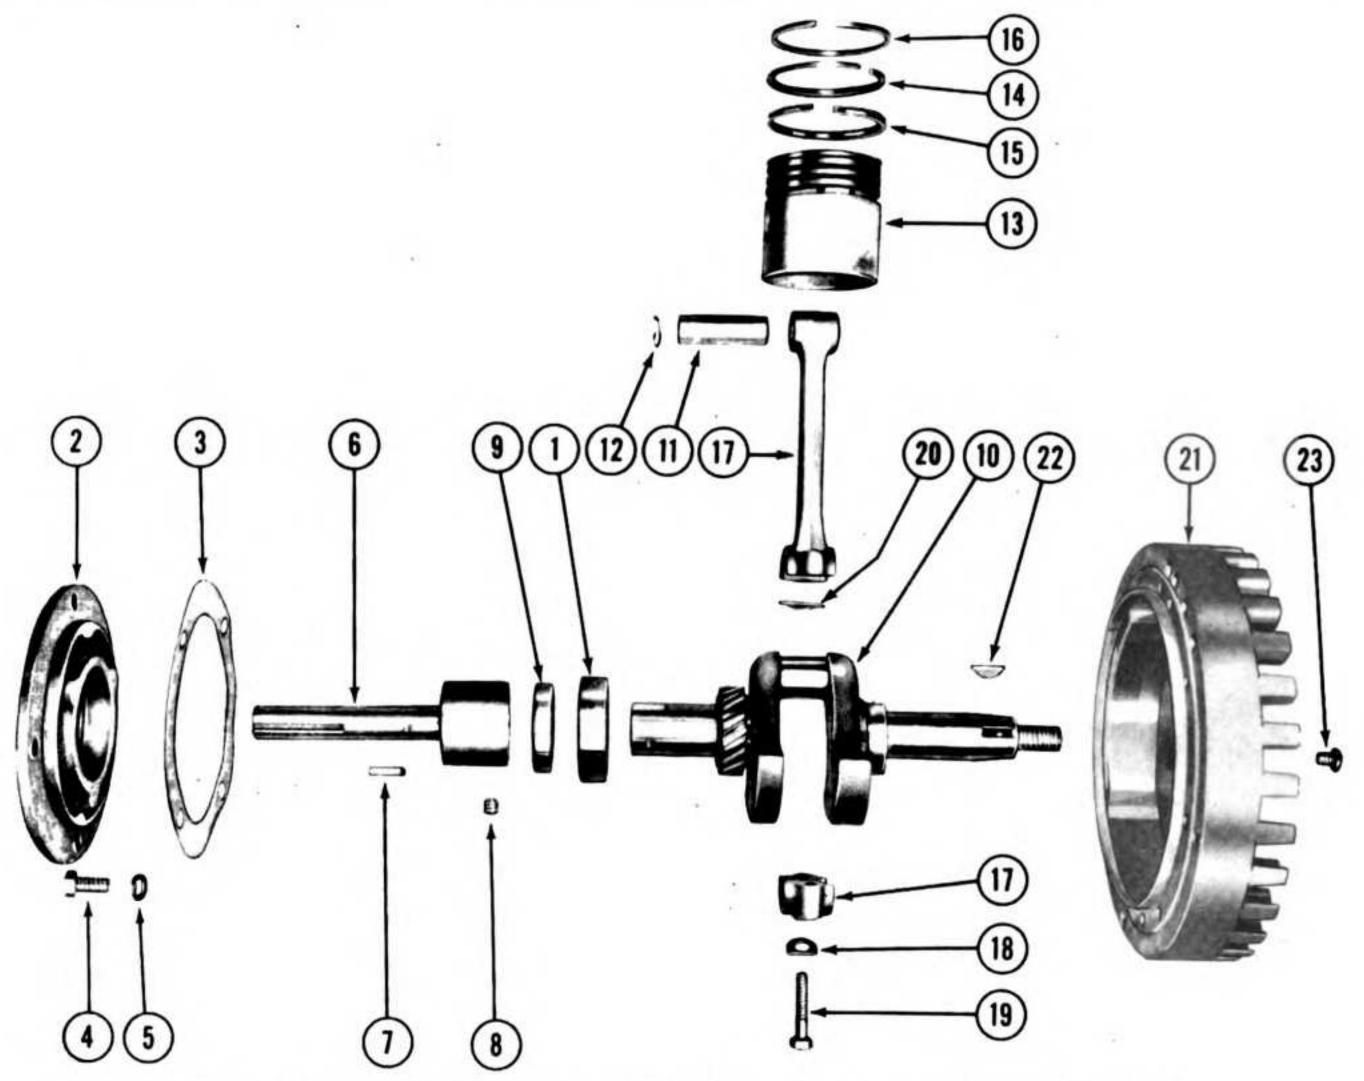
Exploded View of Crankshaft, Piston, Connecting Rod, and Flywheel
